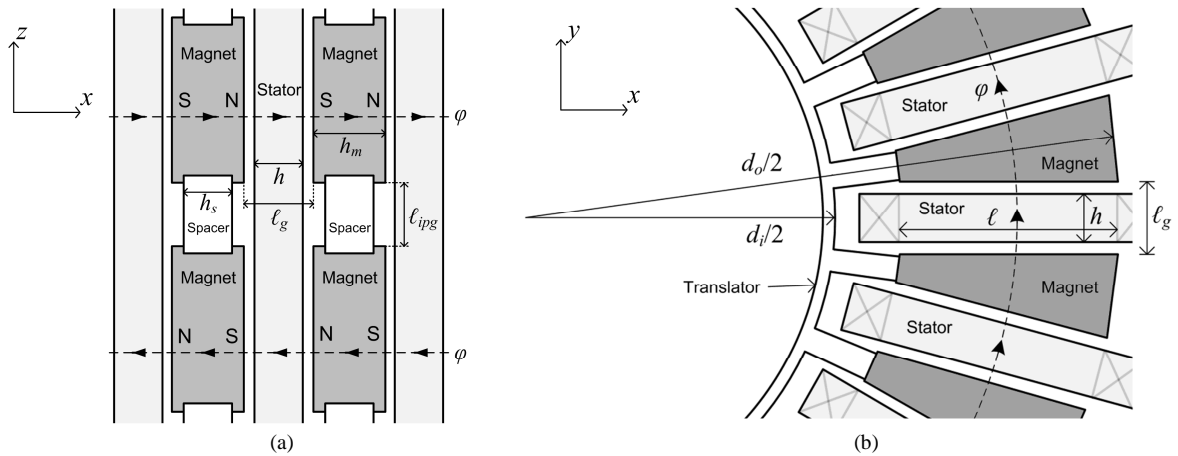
(a) Two-dimensional model of the novel machine and (b) top view of the novel machine showing dimensions.
